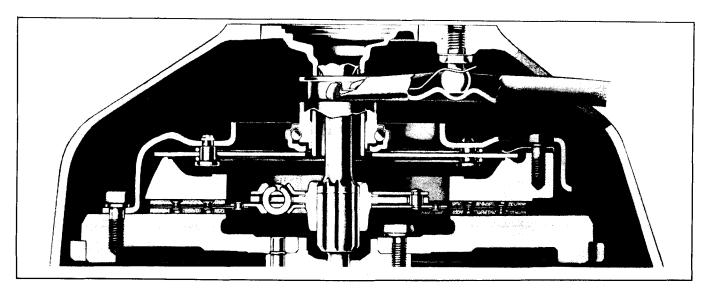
Cross Section of Typical Flat-Finger Clutch
